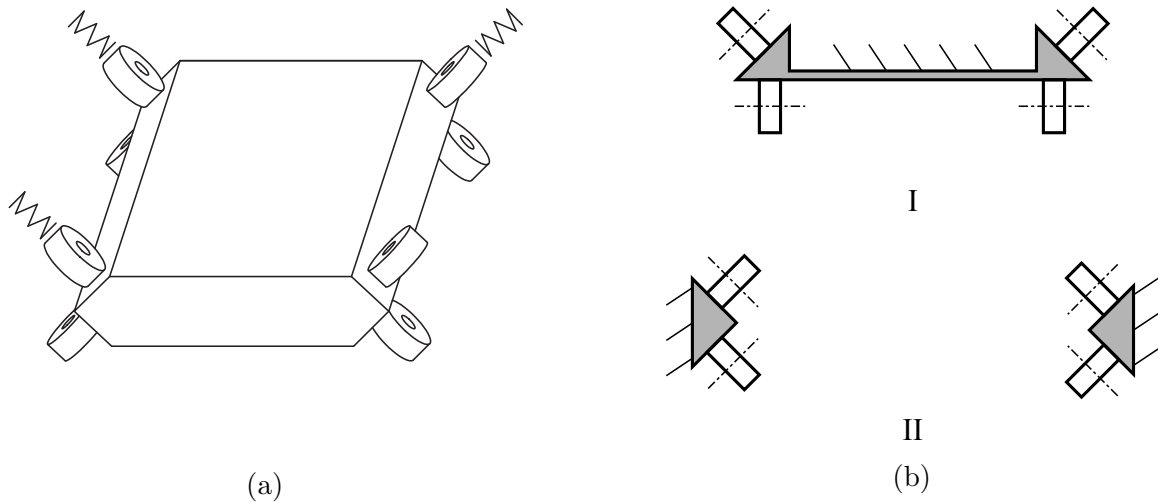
guide: (a) bearing arrangement, (b) section views
